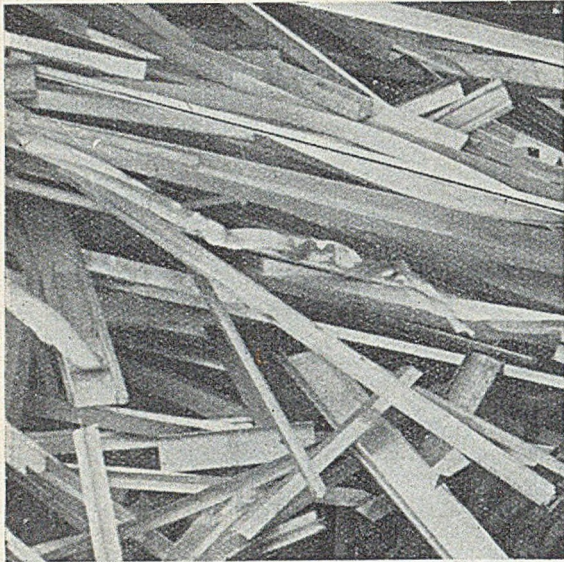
Scrap Ends of Aluminium Extruded Sections.
